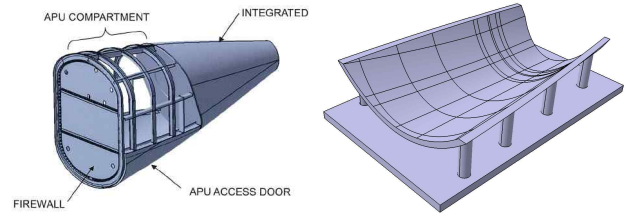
Tailcon section of aircraft Fig. 3. Vacuum Fixture Design
